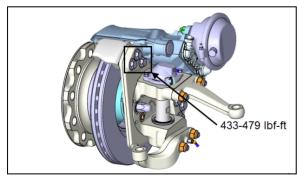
CALIPER CARRIER MOUNTING BOLTS TORQUE SPECIFICATION - TAG AXLE & FRONT I-BEAM AXLE (FRONT AXLE SHOWN)
